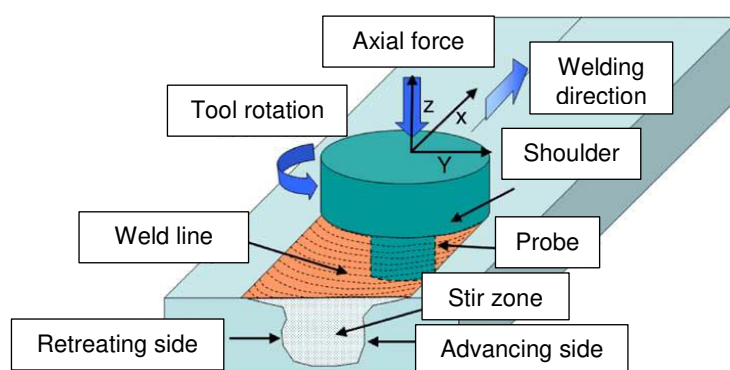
Weld parameters and the indication of the two weld sides [6].
